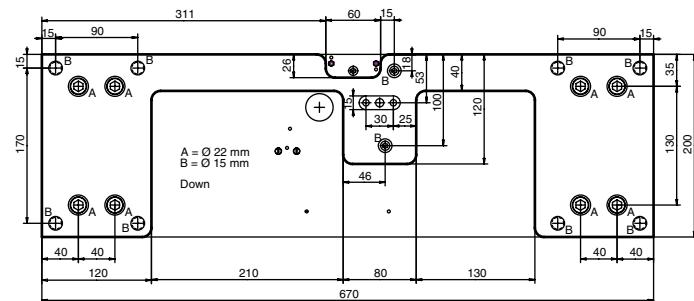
Dimensions of lower compensation plate (All dimensions in MM)
